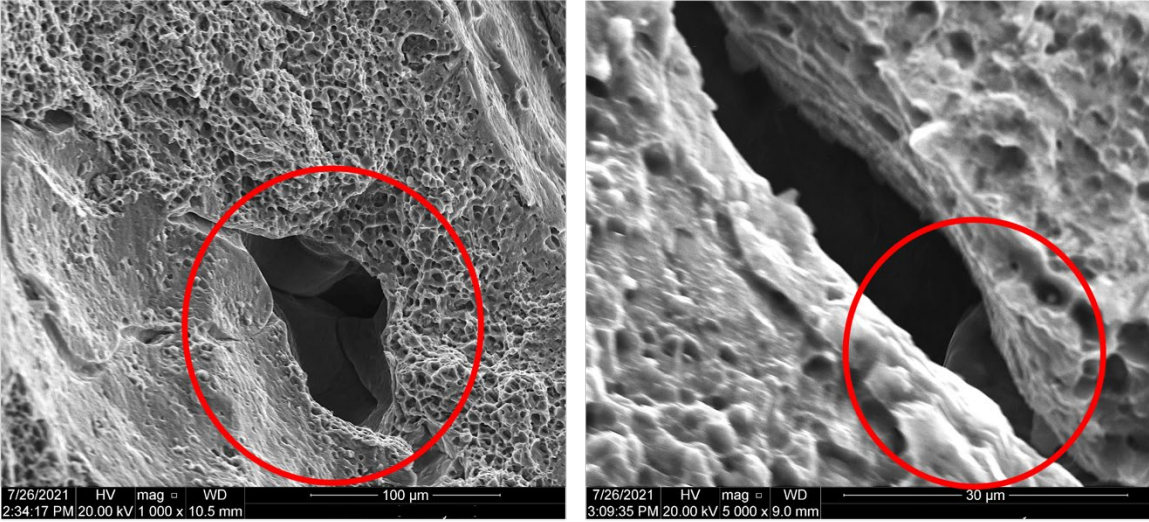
Fracture Surface: Horizontal Block Sample
